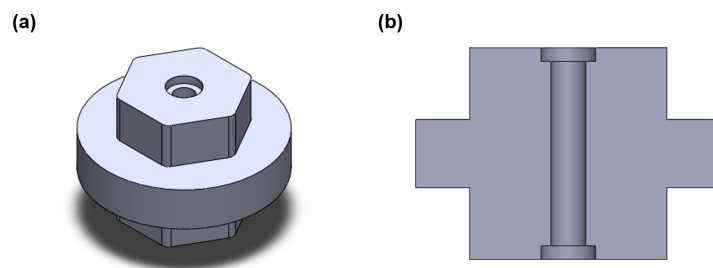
CAD model of Solid SEE. (a) Isometric view. (b) Section view.
